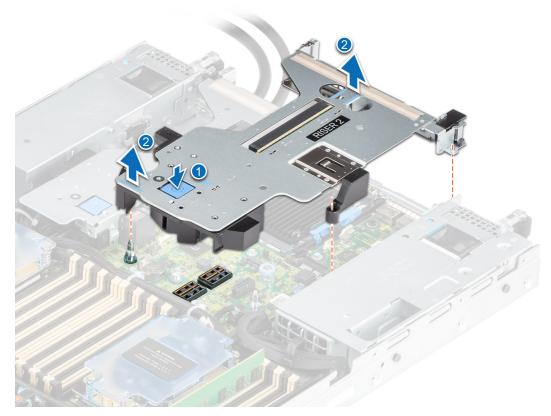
Removing the liquid cooling expansion card riser (liquid cooling Riser 2)
